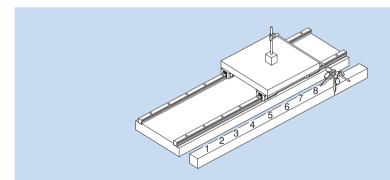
Running Accuracy After the LM Guide Is Mounted
